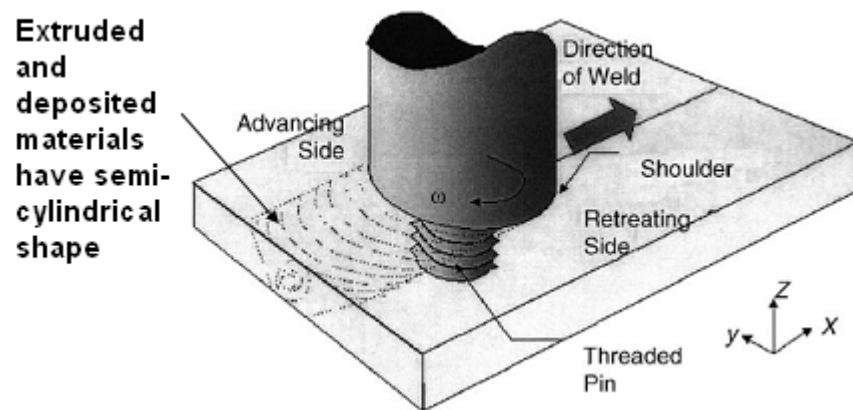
Schematic illustration of the material extrusion and deposition in the back of tool pin, deposition in the nugget zone has a semi-cylindrical shape [49]
